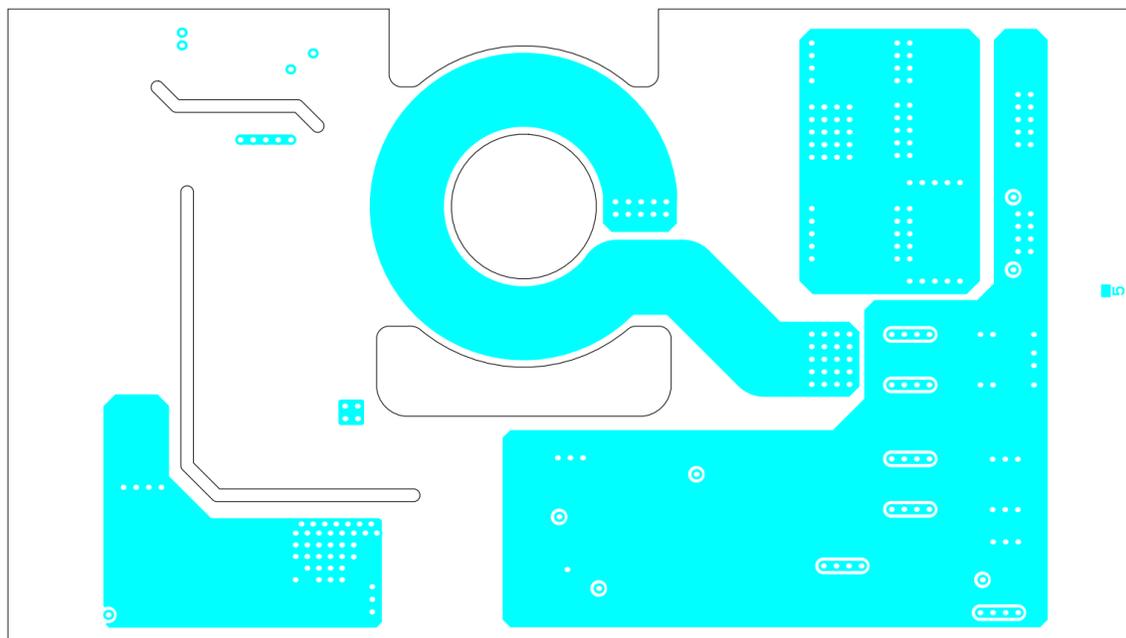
DER-1039Q Mid-Layer 2 PCB Layout
